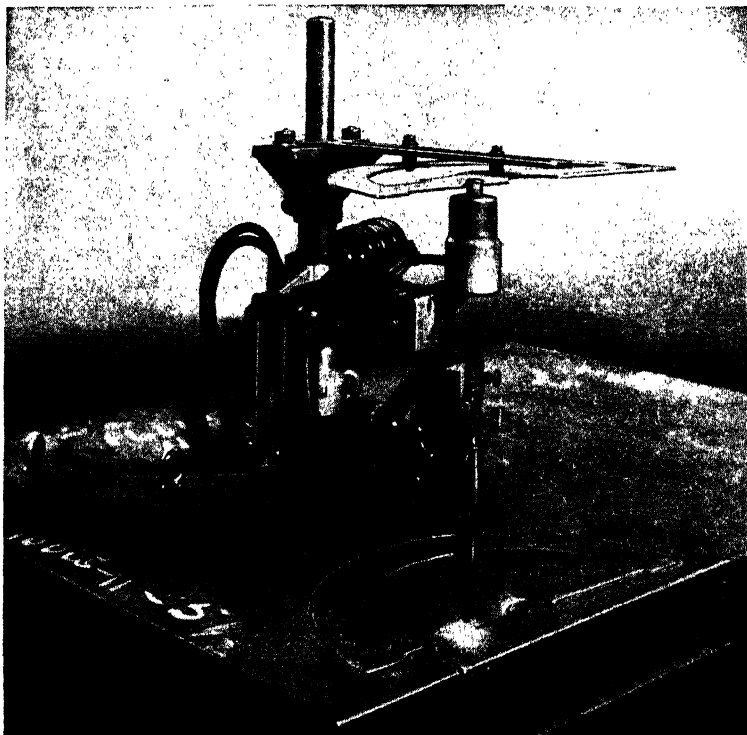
XIV.—Automatic machine for gas cutting. (*Courtesy of the Air Reduction Sales Company, Inc.*)
